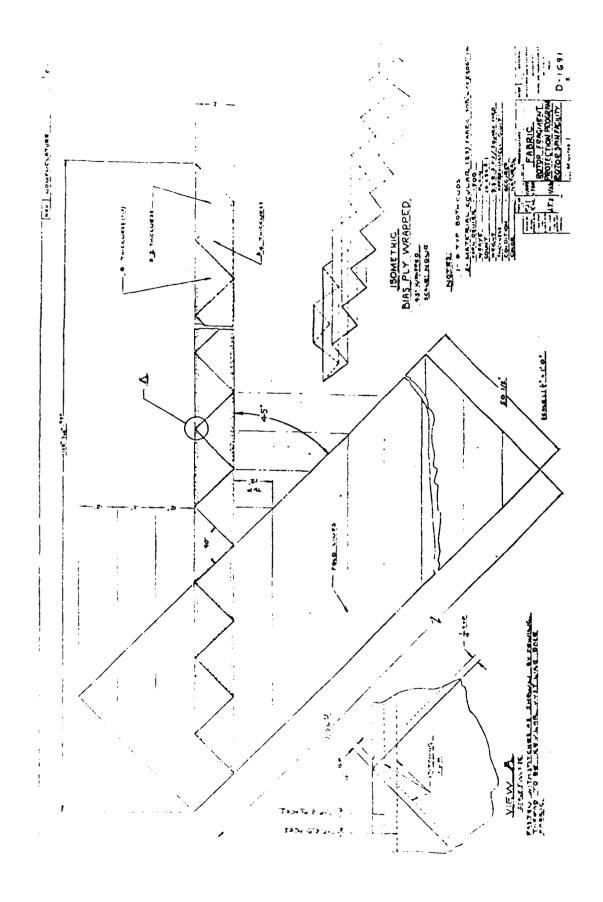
KEVLAR CONTAINMENT RING MANUFACTURING DRAWING (2 0F 3)
